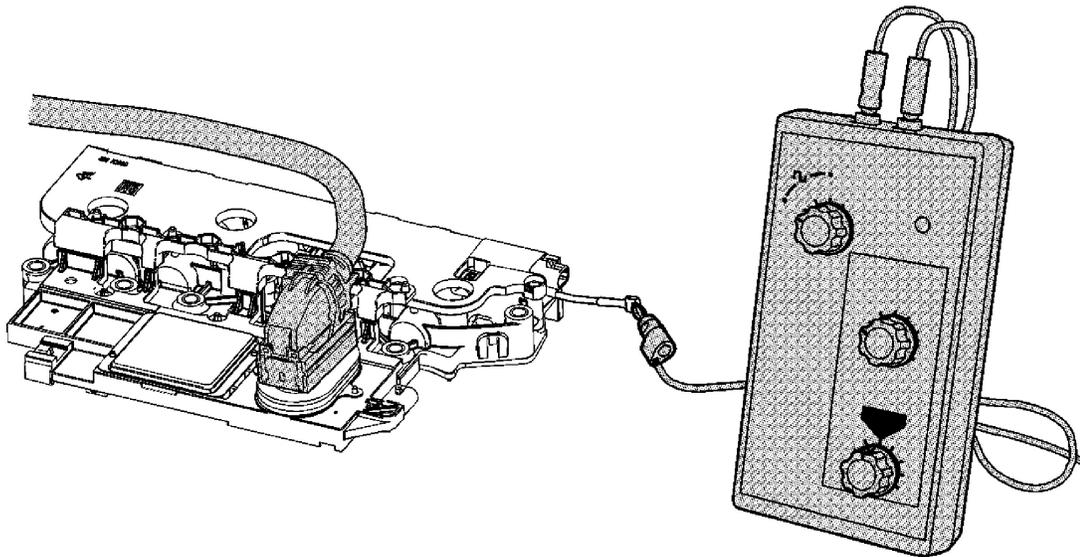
Identifying Control Solenoid Valve & Transmission Control Module Assembly
